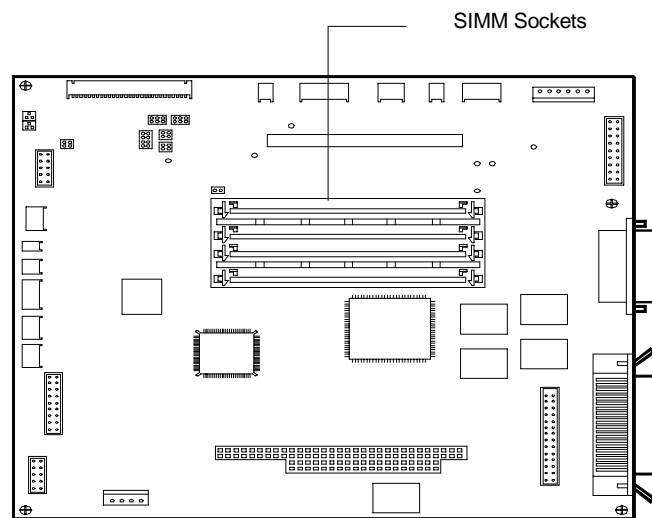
SIMM Sockets (Rev. 15 or Rev. 16 Main Board)
